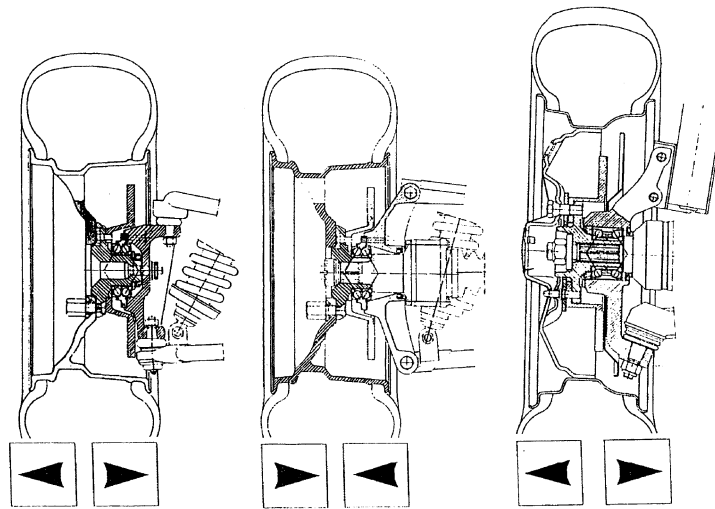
Testing of different types of bearings and wheel suspensions / damping
